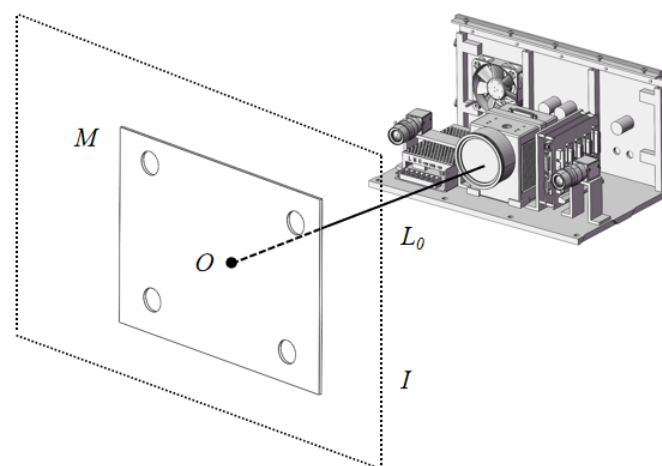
Schematic diagram of the reference calibration position for the projected workpiece.
